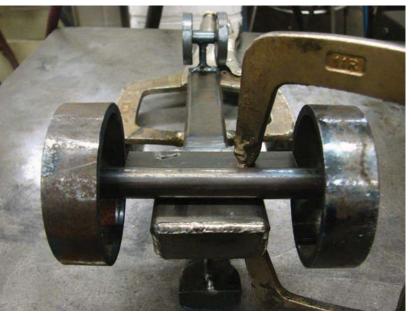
The large tire and axle parts in place and ready to be welded.
